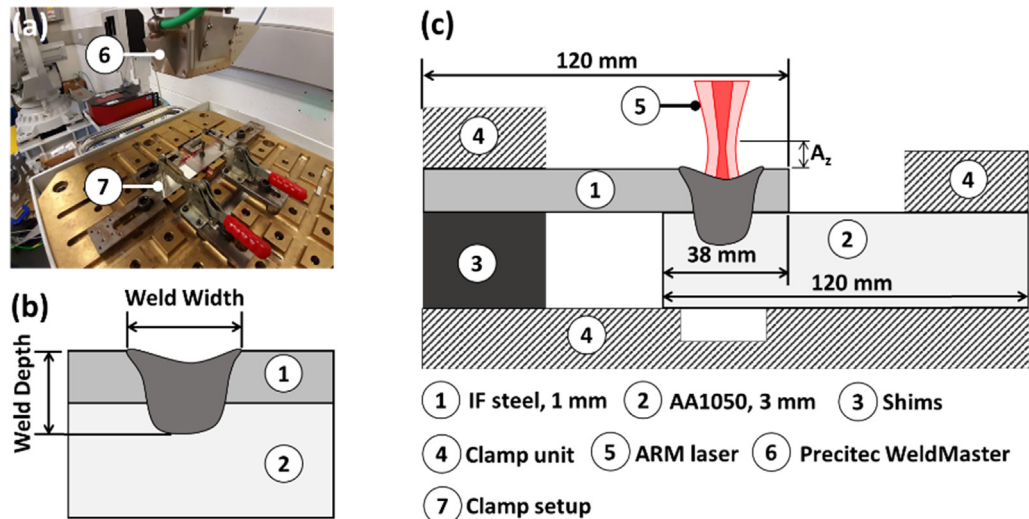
(a) welding setup; (b) definition of the weld profile (depth and width); (c) schematic showing the specimens and the clamp setup (not to scale).
